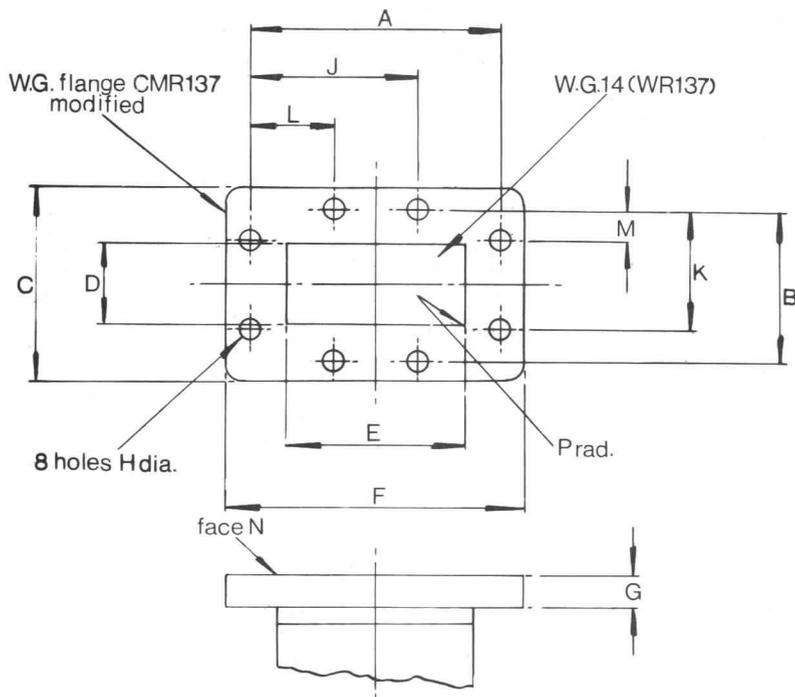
Outline of Flange 53/WGF/14/2 for WM112F Mount
